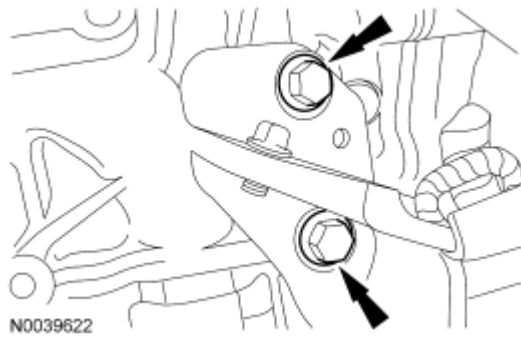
Locating RH Halfshaft Carrier Bearing Bracket Bolts
